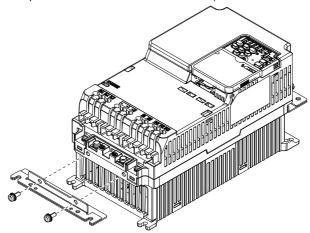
Install Bracket 2 (Bottom of the Drive)
